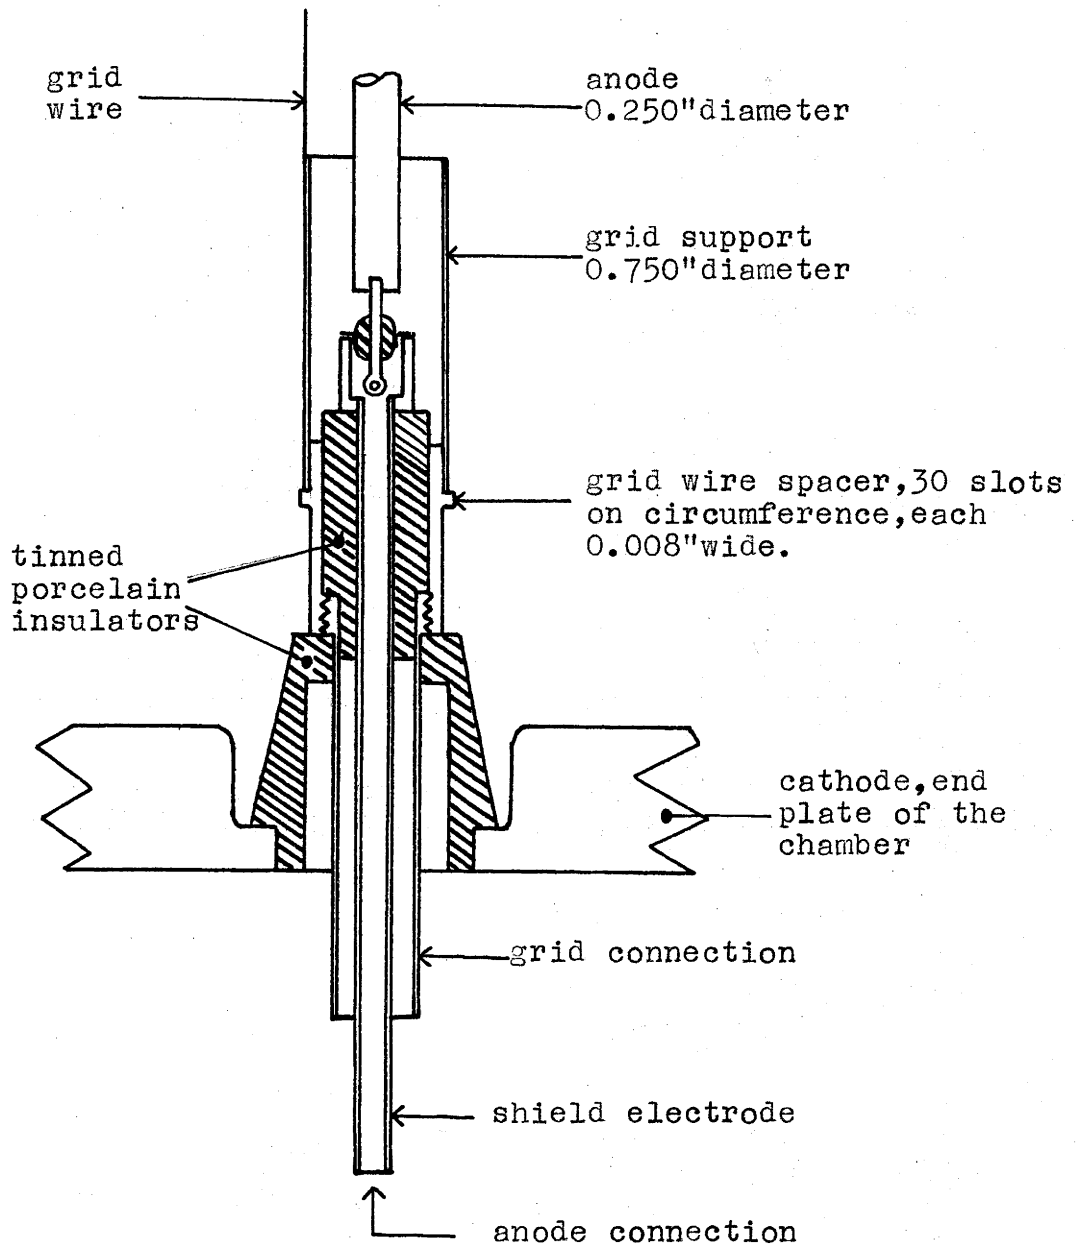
Electrode Assembly for the Gridded Chamber.
